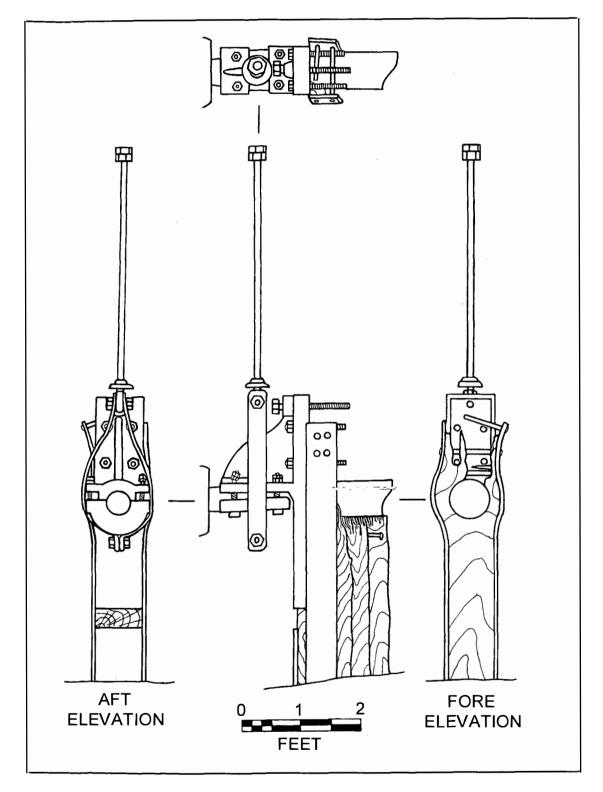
Plan, starboard elevation, fore and aft views of adjustable stern bearing assembly. Drawing by Jim Bradford.
